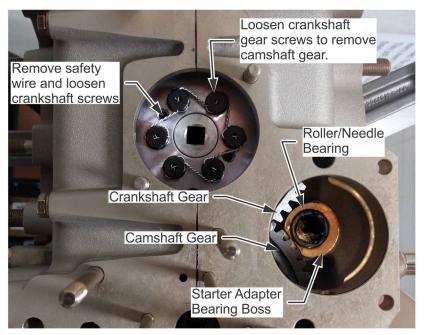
Camshaft Gear Access Locations, Crankcase, typical
